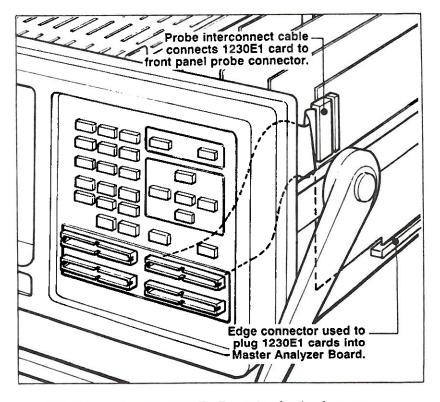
Installing 1230E1 Expander Cards. Connect the probe cables to the expansion cards as shown here. Interconnect cable A should already be attached to the Master Analyzer board.
